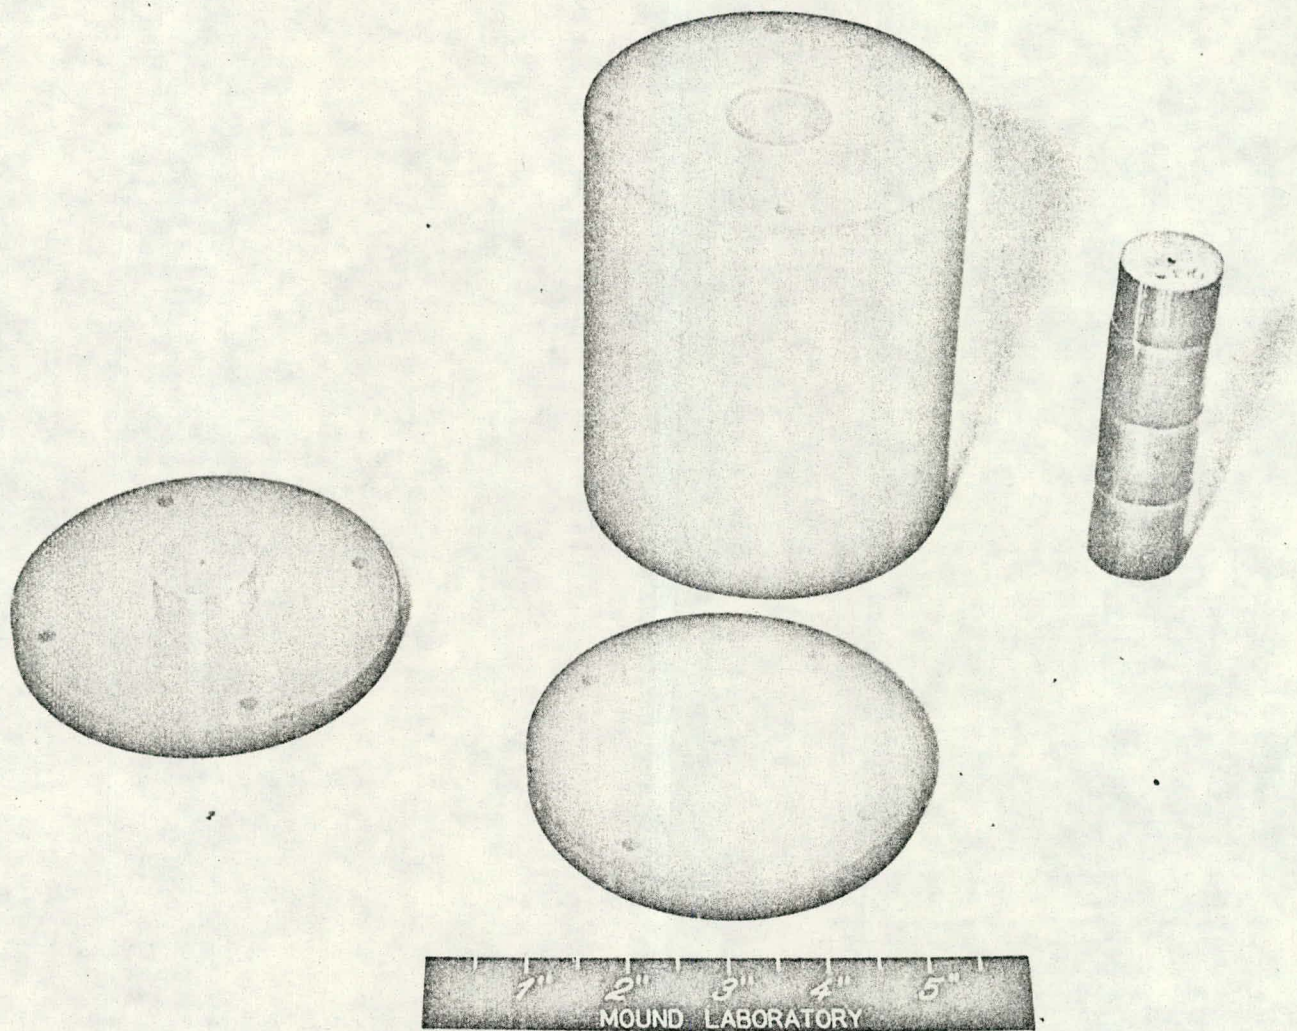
The disassembled sample cylinders stacked end-to-end are shown with the graphite sample holder and end caps.
